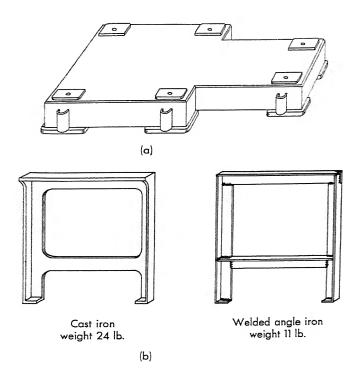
Welding replacing casting. ("Material Utilization in the Metalworking Industries", Institution of Production Engineers, London, 1955)
